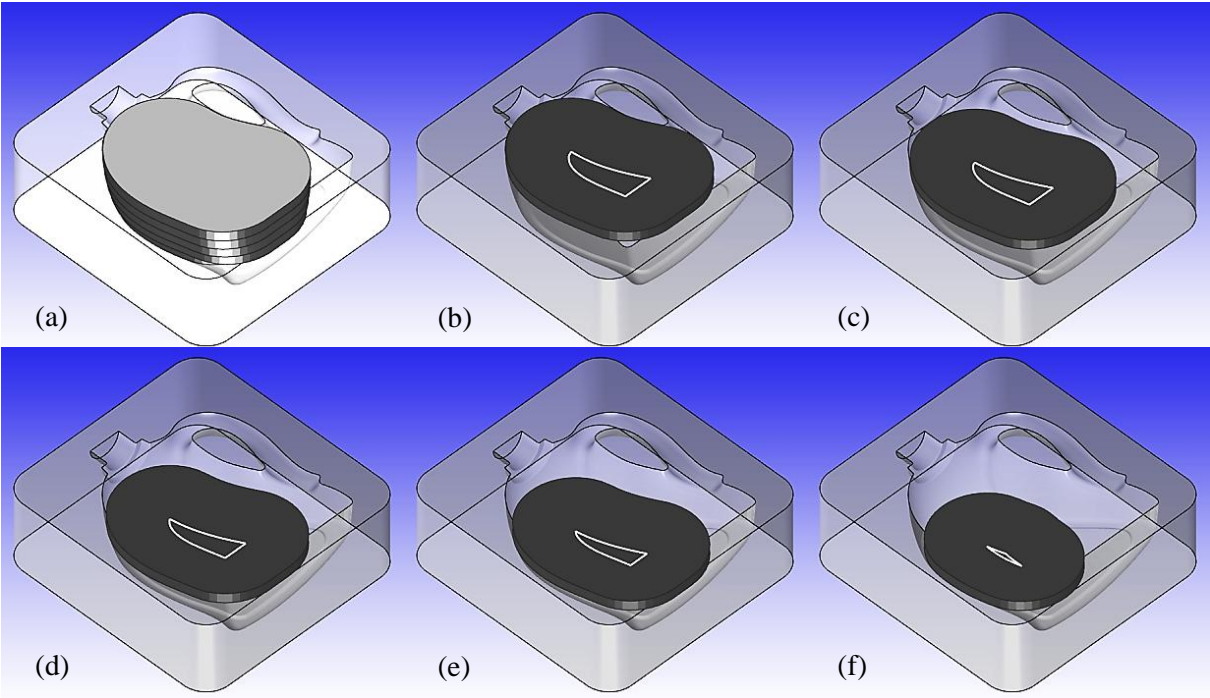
An example of using two tools machine the entire cavity. *The first tool accessible volume and tool path.*(a) Tool accessible volume. (b) First machining layer.(c) Second machining layer. (d) Third machining layer. (e) Fourth machining layer. (f) Fifth machining layer.
